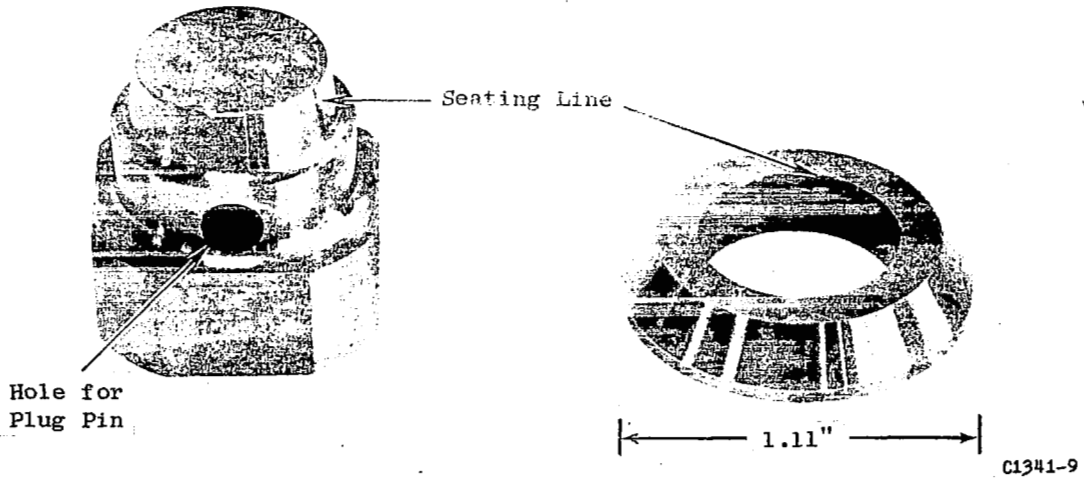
W-25Re Plug and Rhenium Seat of the 1-Inch Refractory Metal High Temperature Alkali Metal Valve. (C67112230)
